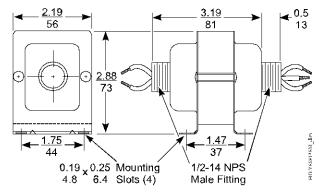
Dimensions for Y65F13 and Y65S13 Types, in./mm
